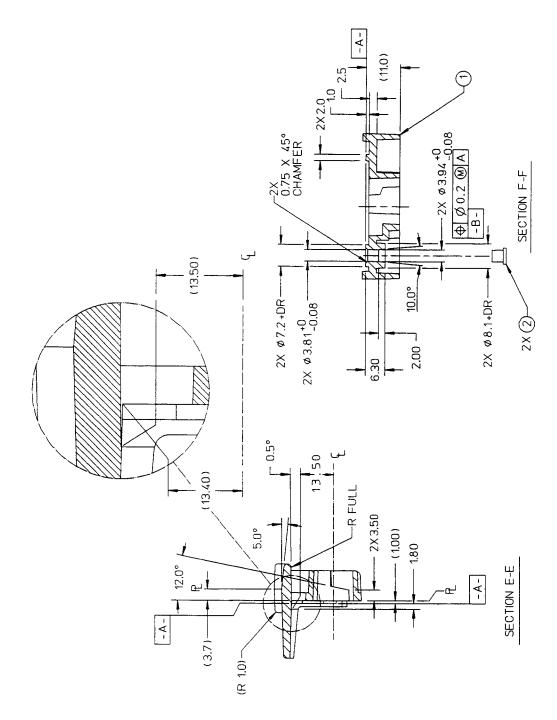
, HOUSING, LATCH SHEET 3 OF 4
